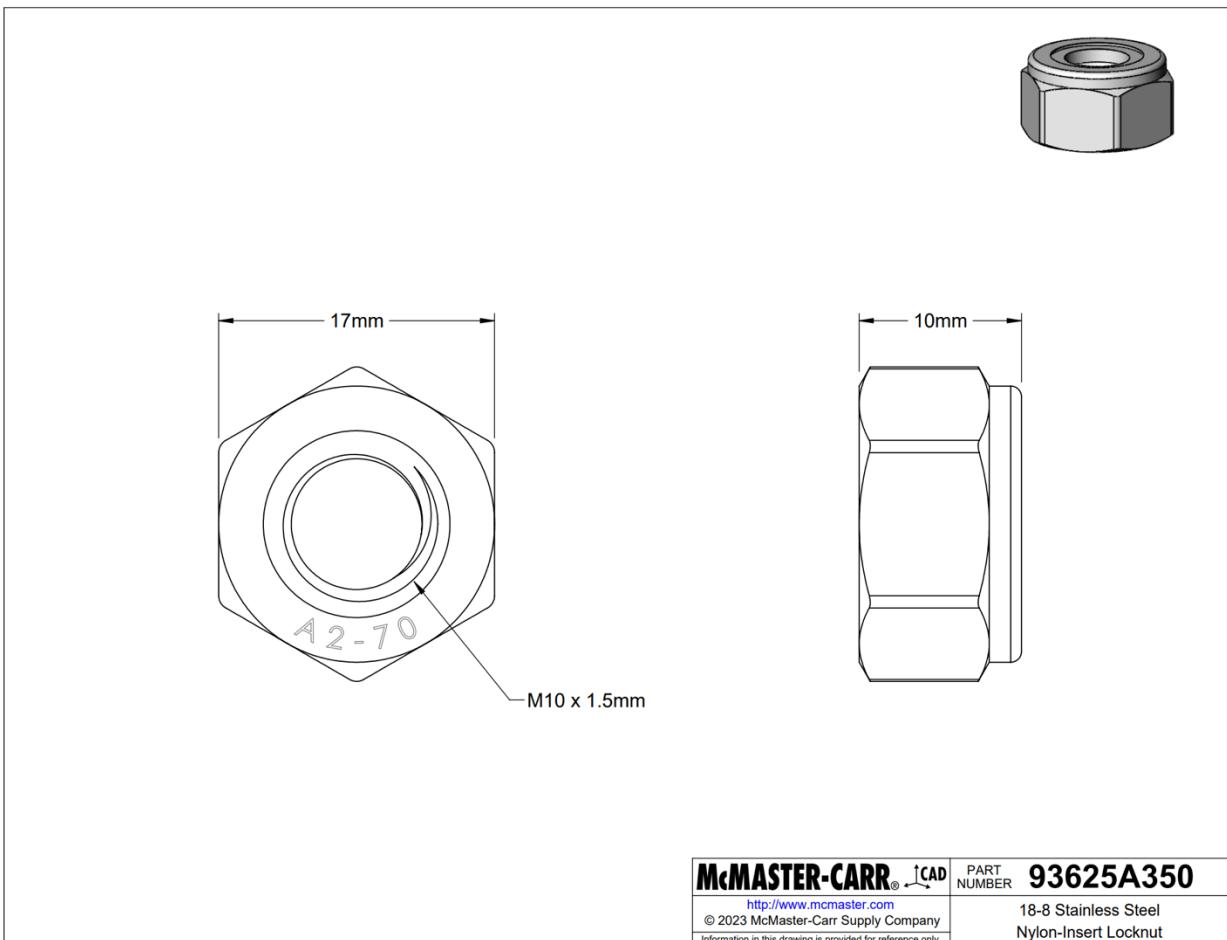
2D CAD drawing of the 93625A350 locknut
